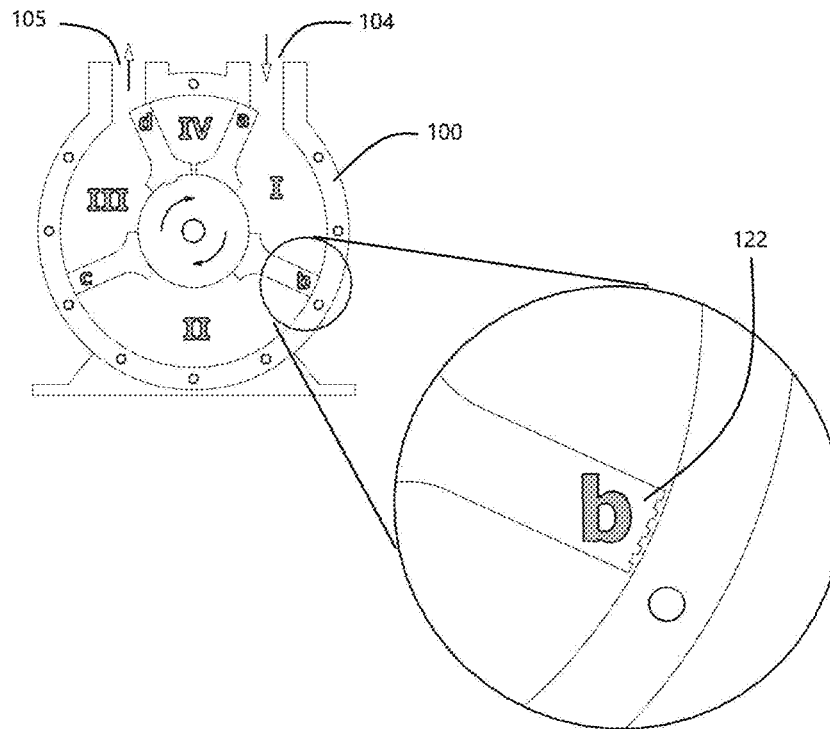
coaxial radial vane type motor with labyrinth no-contact seal clearance with the casing.
